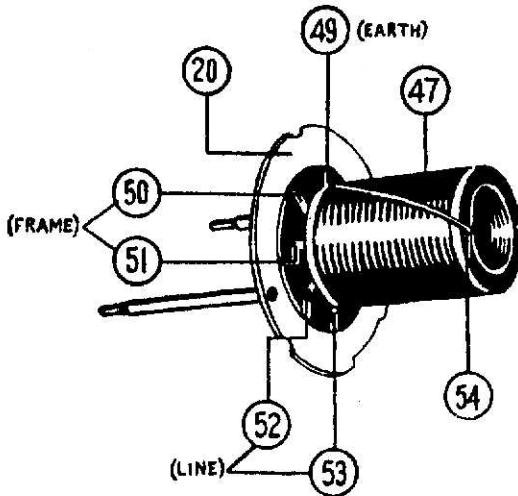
DEFLECTION-COIL ASSEMBLY
